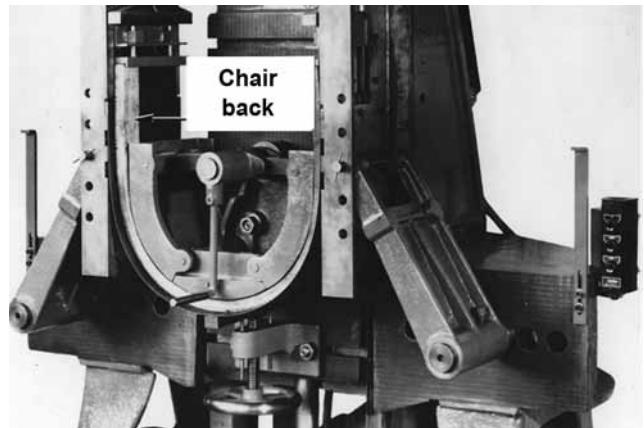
Chair back being bent through an arc of 180° in a bending machine.
